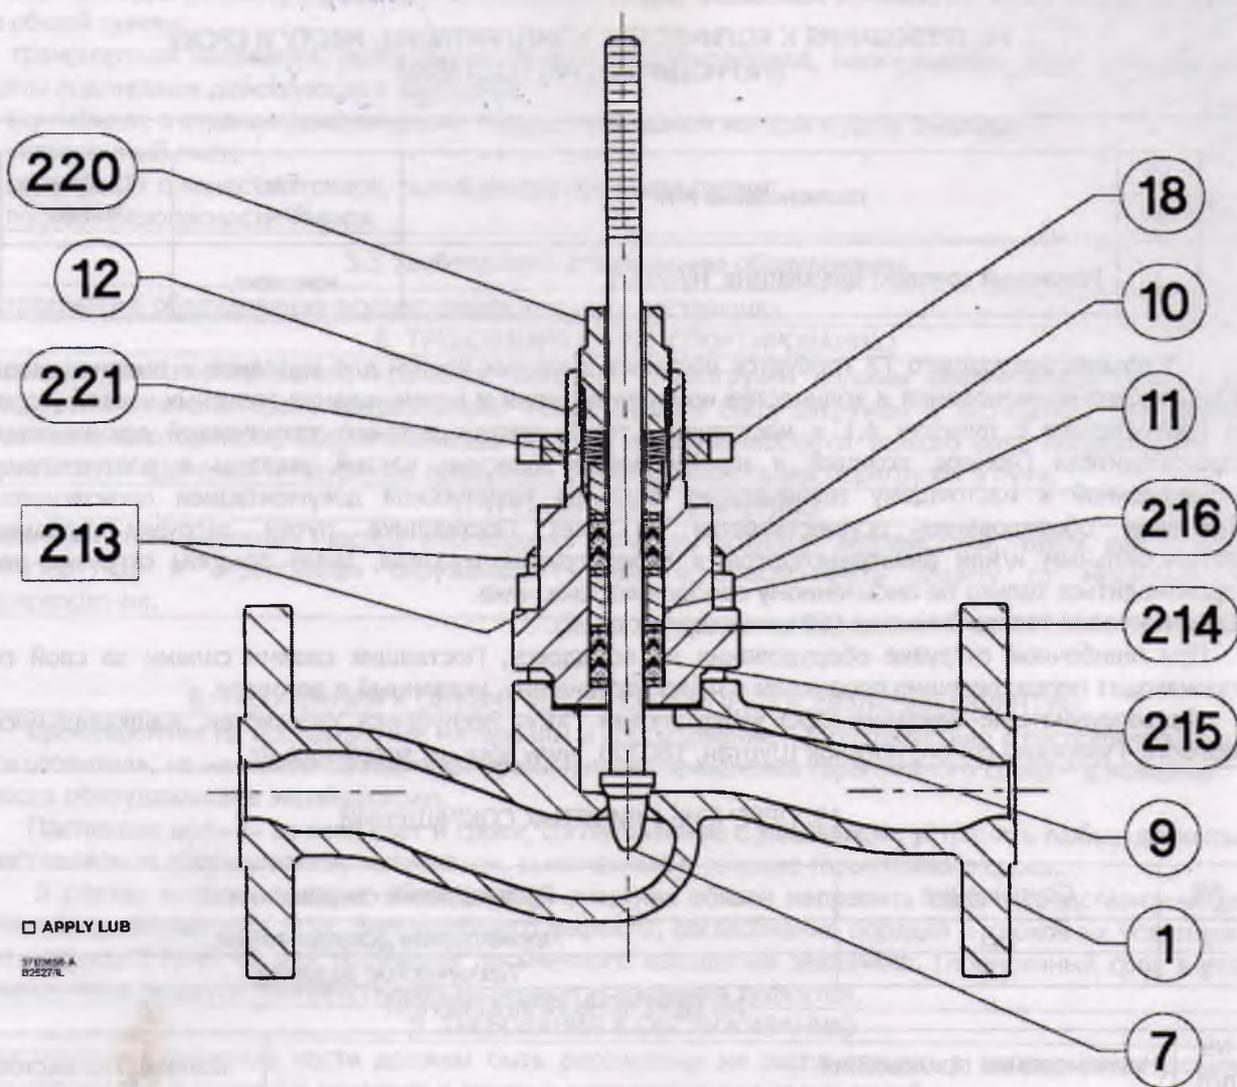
Design CP Control Valve Assembly (0.5 and 0.75 Inch)
